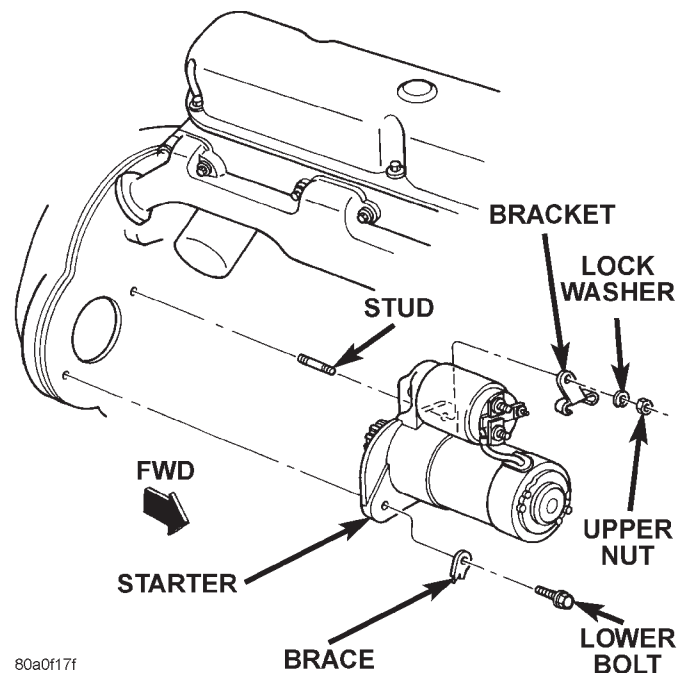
Starter Remove/Install - 5.2L and 5.9L Engine
